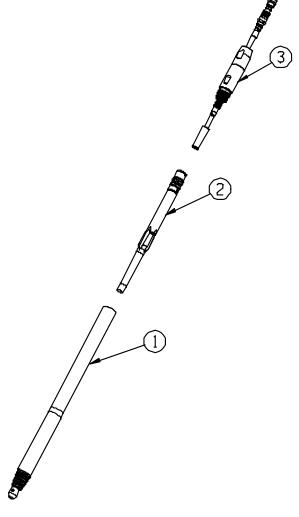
1-Body/Anvil, 2-Striker, 3-Tail Assembly
